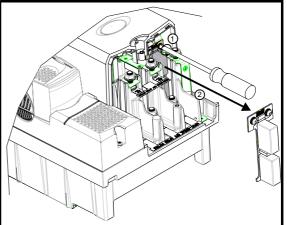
Removal of internal EMC filter (size 1 to 3)
